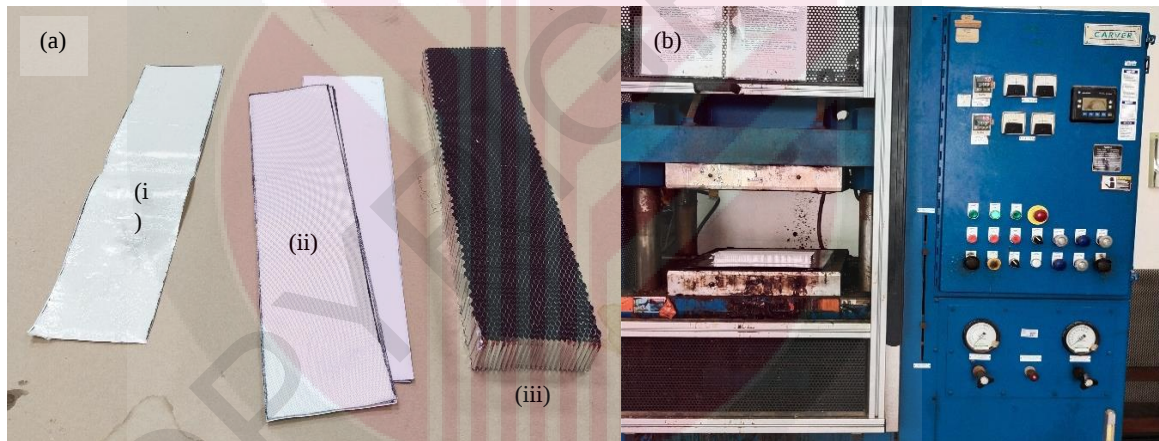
(a) Honeycomb sandwich panel fabrication material: (i) epoxy prepreg film; (ii) four layers of woven prepreg glass-fibre facesheet; and (iii) aluminium honeycomb core. (b) Hot press machine for the curing process.
